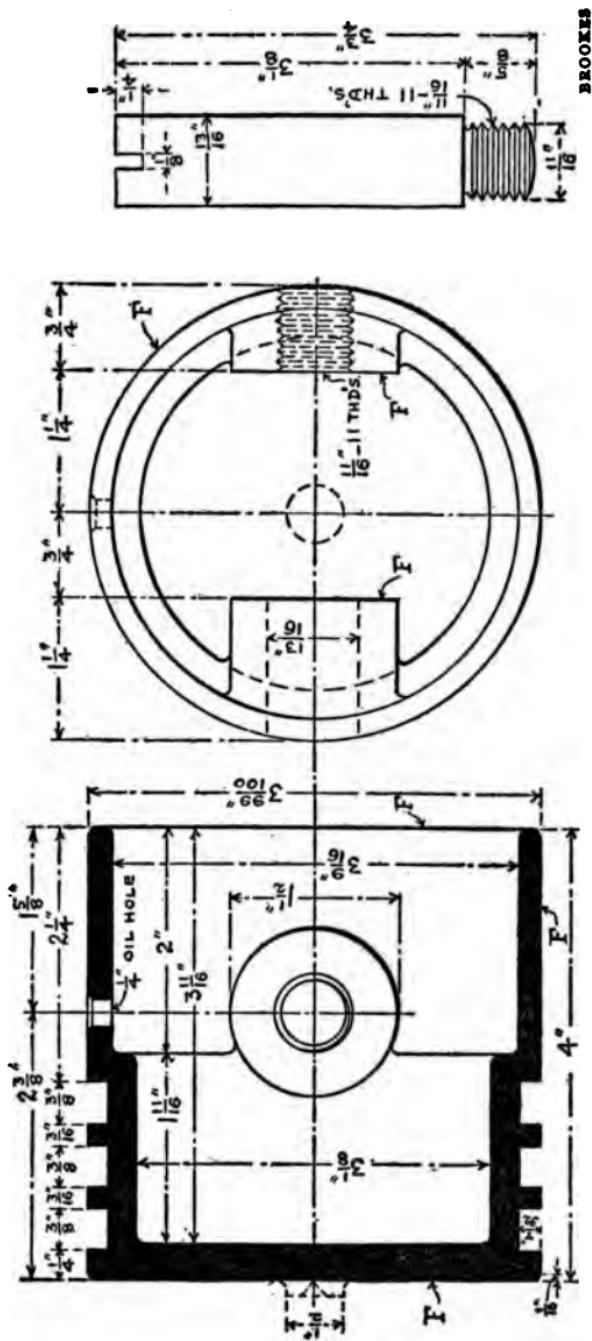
Sectional diagrams of a typical piston for a four-inch cylinder; showing structural details and dimensions; also piston pin with screw insertion.
